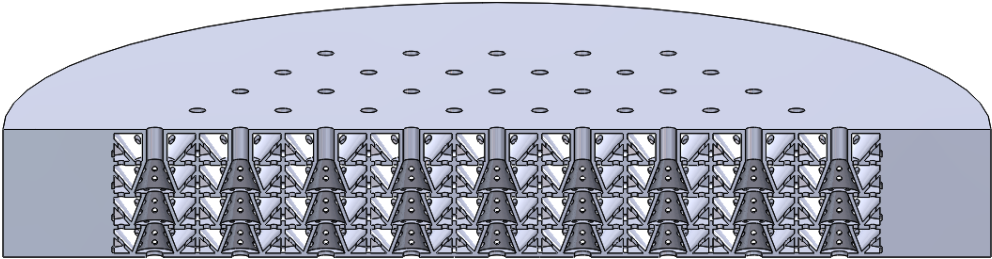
MIMO - Large Cavity AMM Panel - CAD - Vertical Cross-Section View
